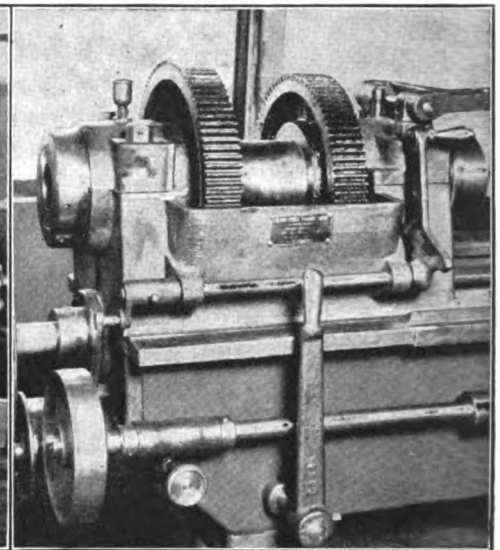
HEADSTOCK OF "BLOOD" LATHE WITH COVER REMOVED
